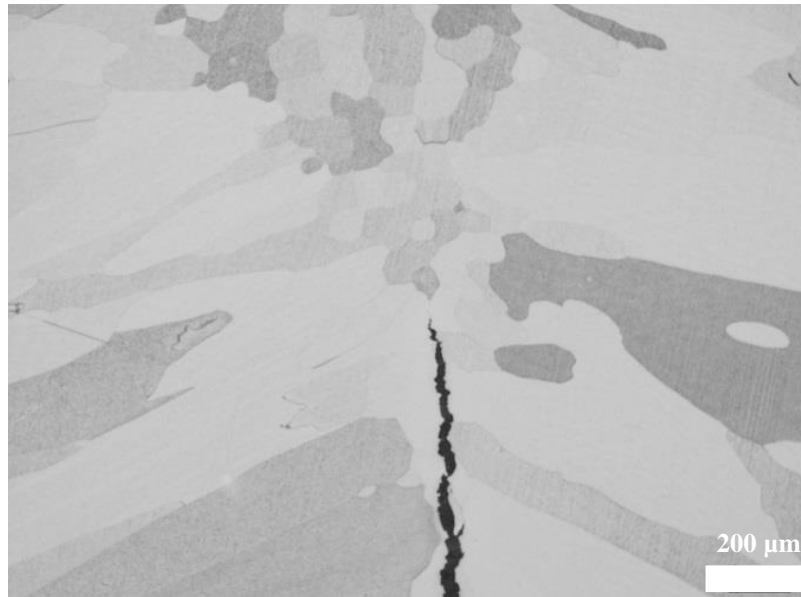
The centre of the weld metal showing the crack of the 0.6Nb stabilized ferritic stainless steel (D:0.6Nb) during the welding speed 6 mm/s.
